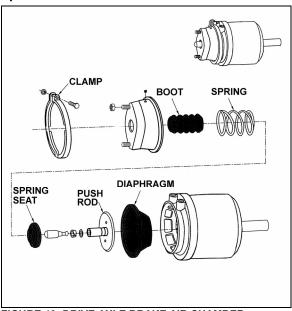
DRIVE AXLE BRAKE AIR CHAMBER
